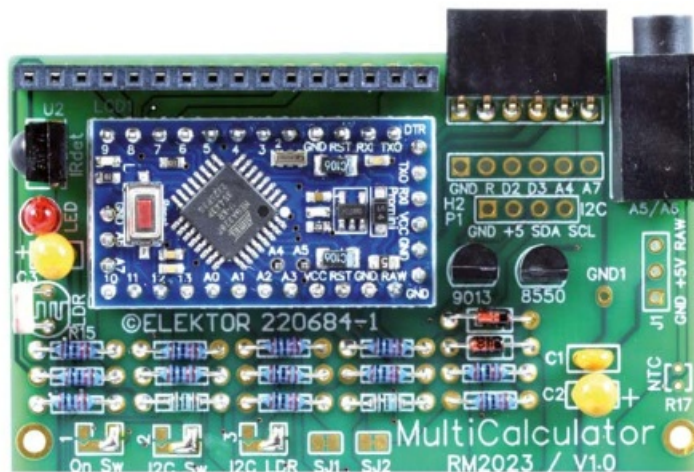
Pro Mini module U1 and connector J2 soldered. Don't forget to solder A4 and A5!
